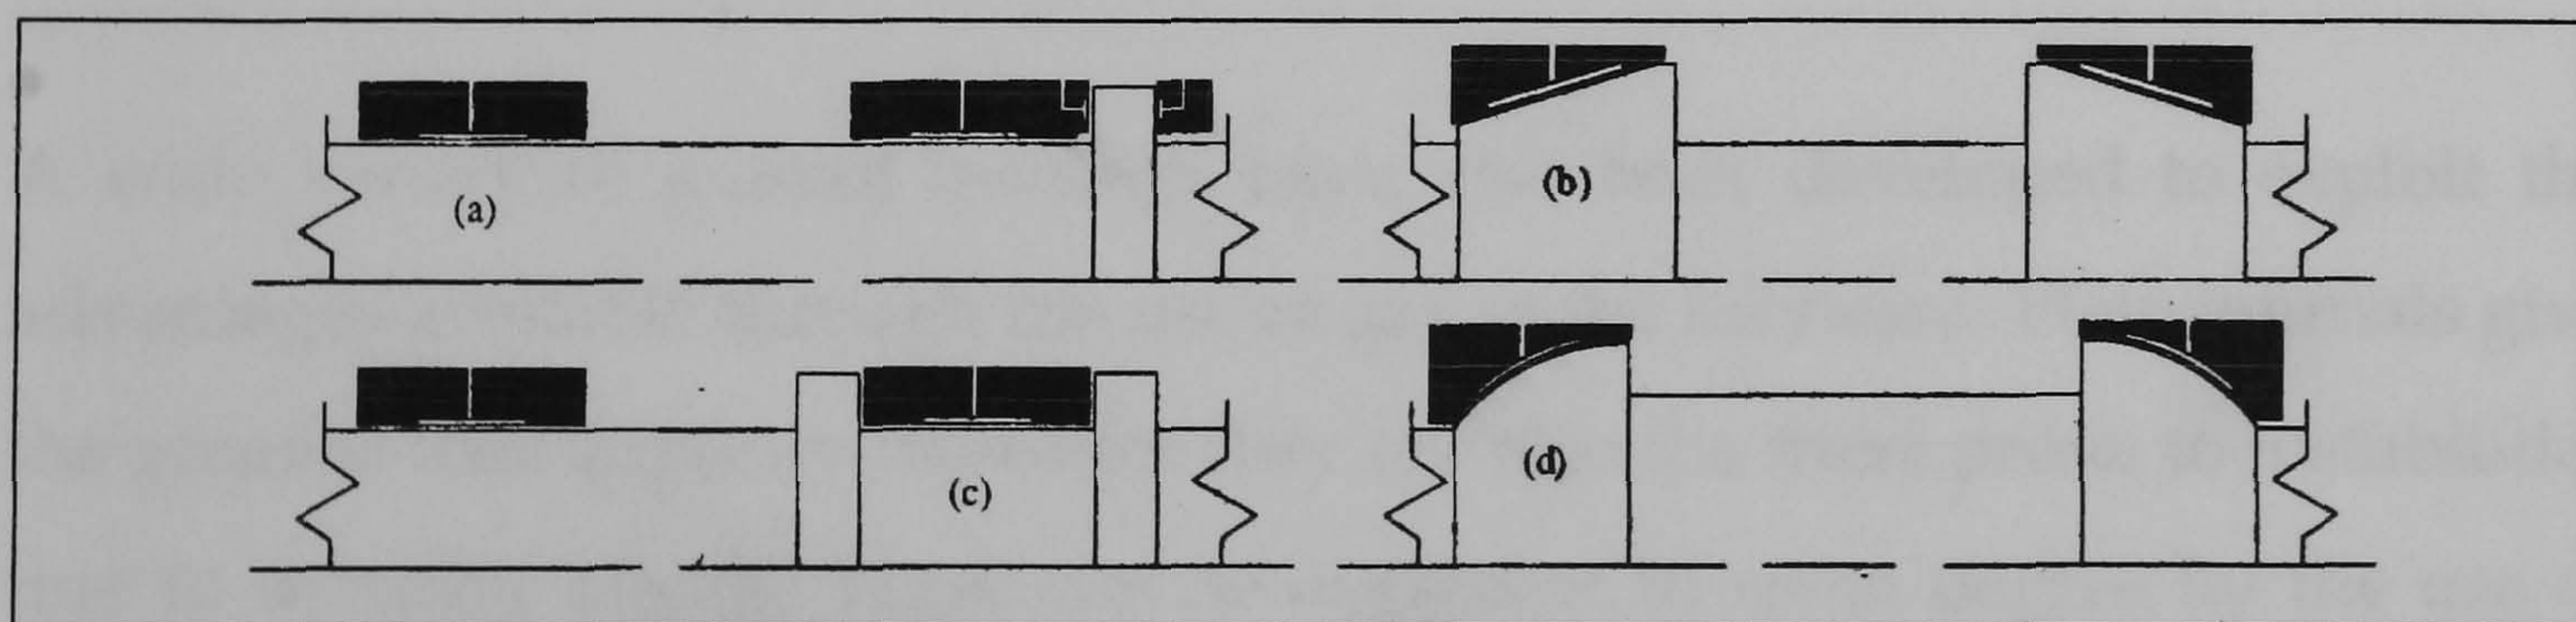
General types of air bearings, A) cylindrical journals with annular thrust bearings, B) conical journal bearings, C) Yates bearing, D) hemispherical journals (from ²⁸)
